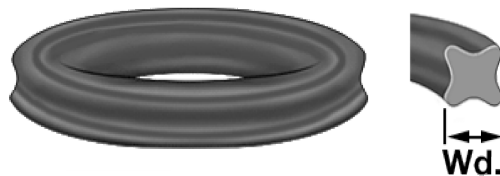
Schematic of the cross section of an X-profile O-ring used in the Taylor-Couette cell design to ensure a tight seal. The nominal width of the O-ring used is $1/16''$ with an outer diameter of $2''$.
